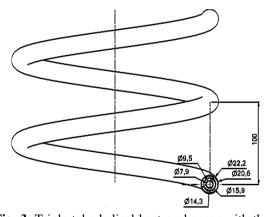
Triple-tube helical heat exchanger with their Teflon module (drawing).
